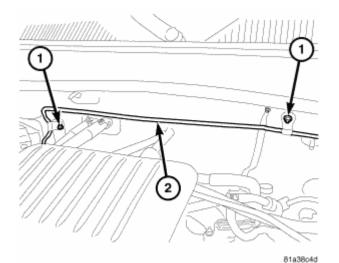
Identifying Brake Line & Mounting Clip Studs Courtesy of CHRYSLER LLC
